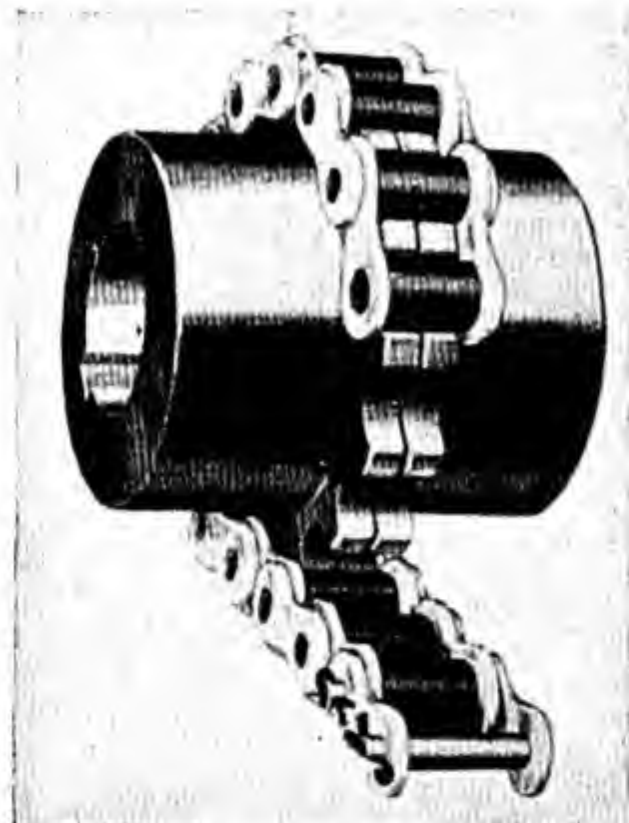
Flexible coupling using roller chain to connect the coupling halves.
